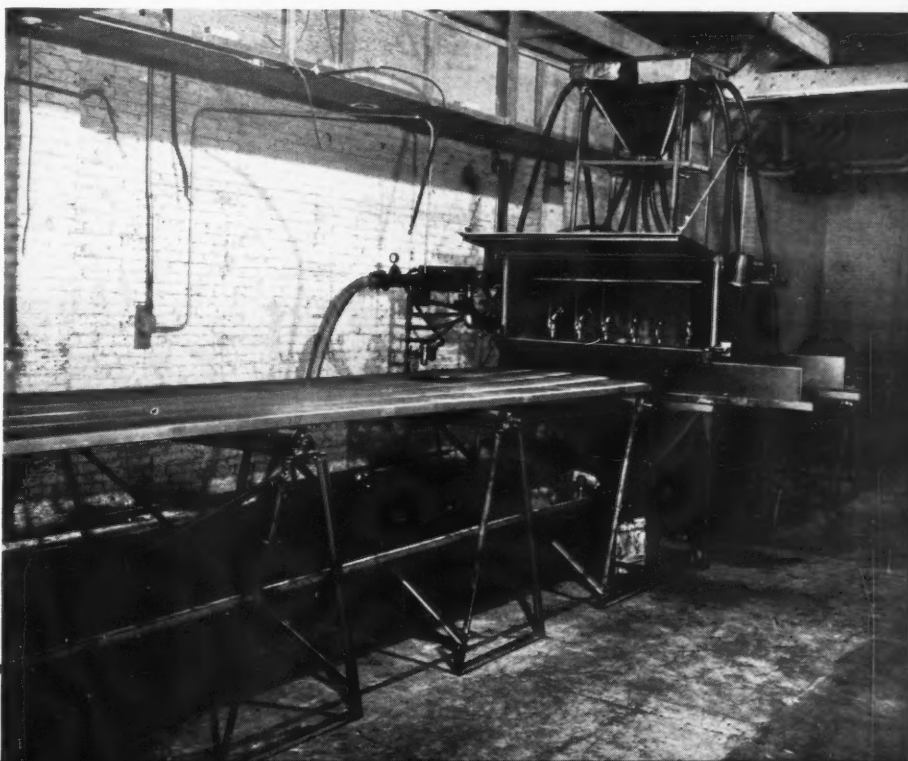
Wing panel being conveyed over first series of roller stands of shot-peening machine. Shot is stored in hopper above cabinet.
